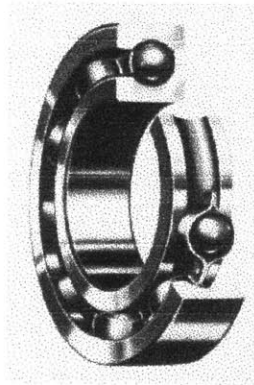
Deep groove ball bearing. Source: NSK-RHP
